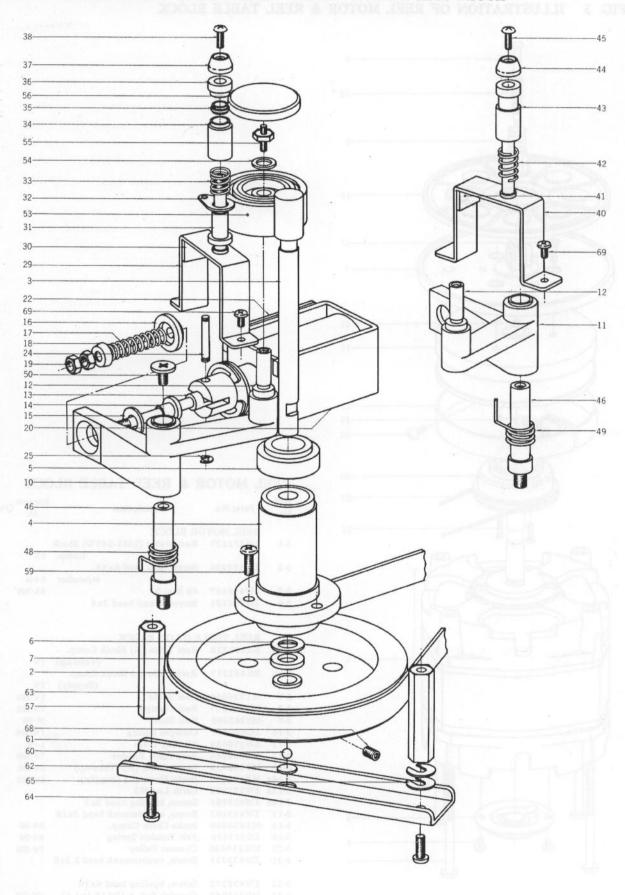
ILLUSTRATION OF REEL MOTOR & REEL TABLE BLOCK
